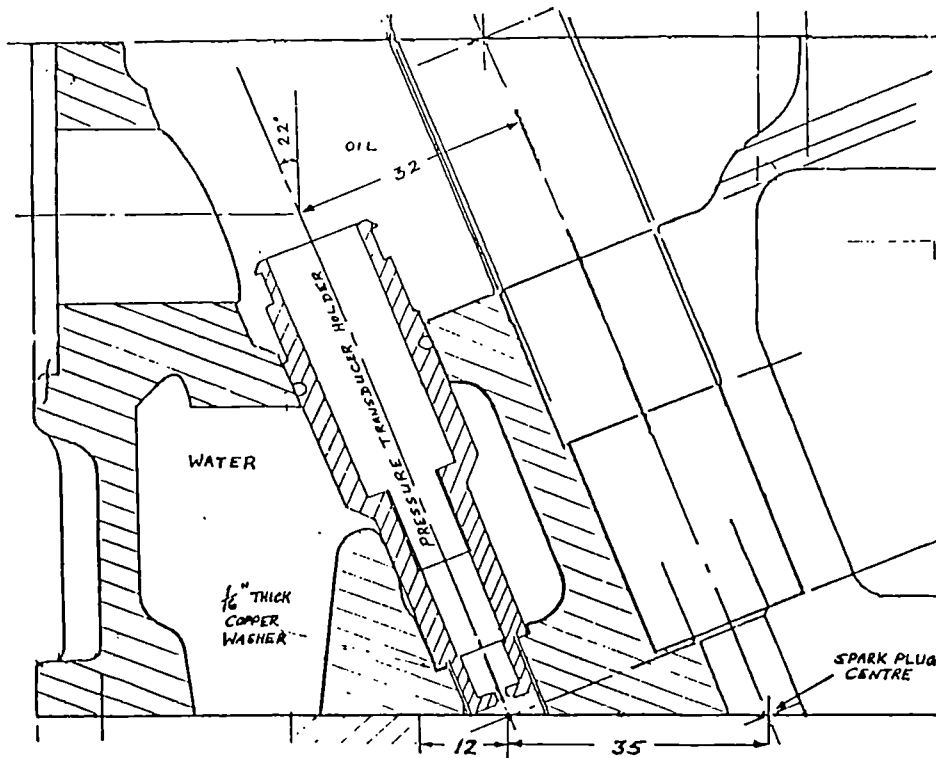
Cylinder head cross-section showing positions for the spark plug and pressure transducer.
